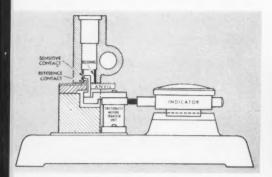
This illustration shows a gage for determining if the hole in a bushing inserted in a casting is square with the casting face.
